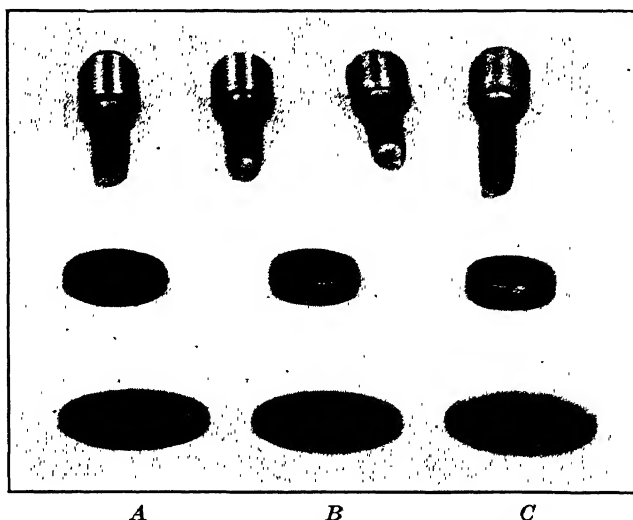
TYPICAL TENSILE, COMPRESSION AND BLANKING TEST SPECIMENS.
